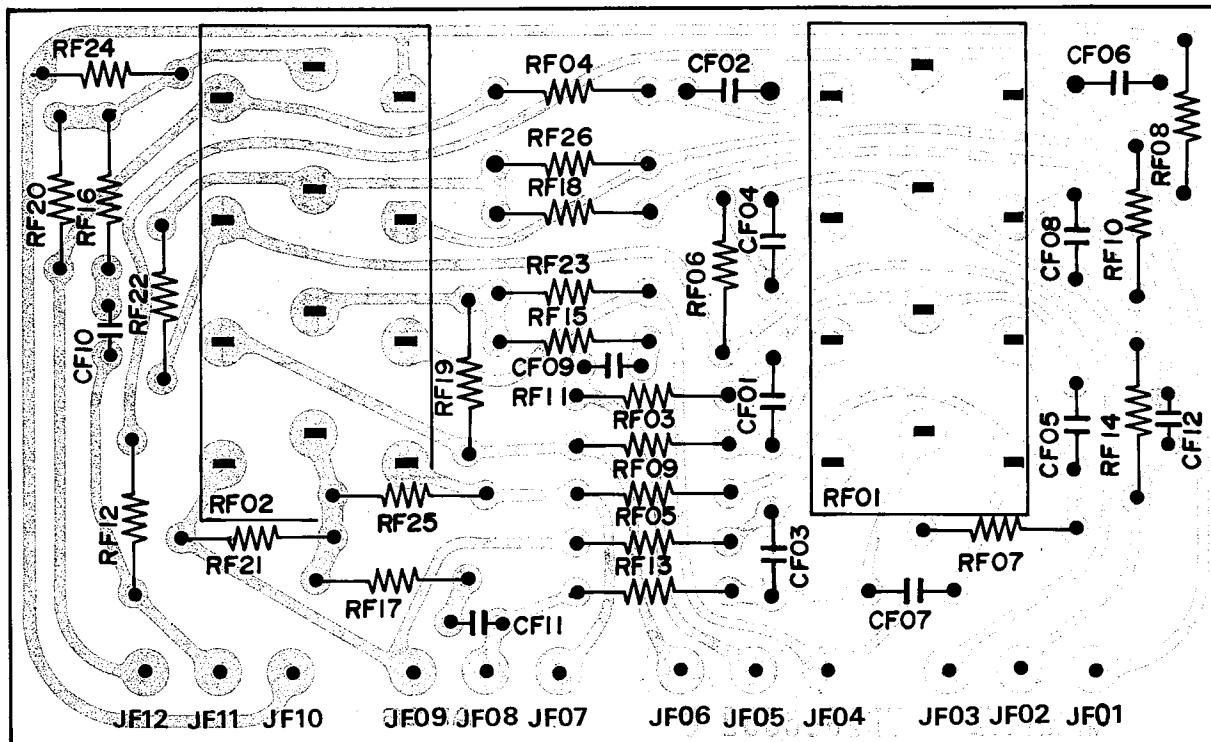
Tone Control Unit Assembly PF01 Component Locations
